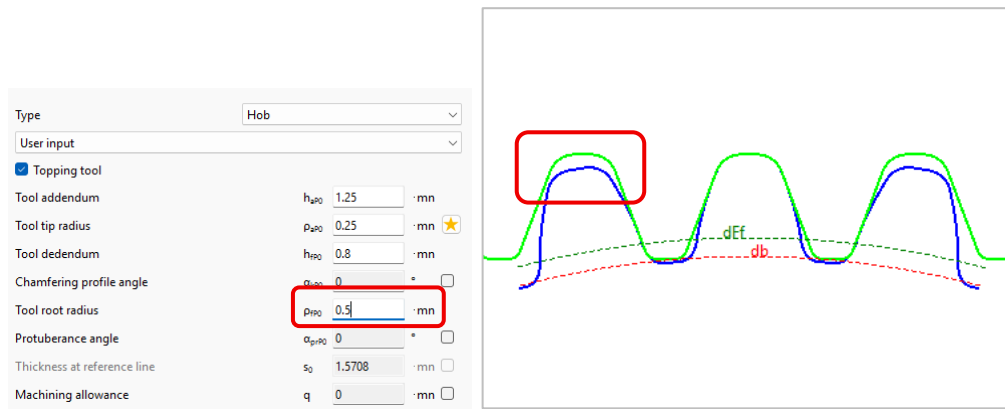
Definition of a root fillet on the hob, for a topping tool. A tip rounding is generated at the gear via the generating process.
